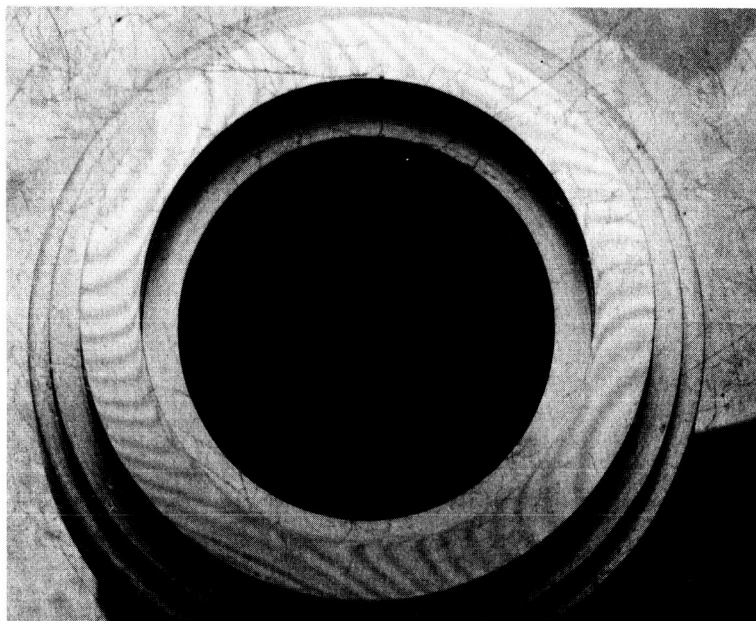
Lapmaster Interference Photo of Seal Surface After TIG - Welding of Connector to Tubing.
